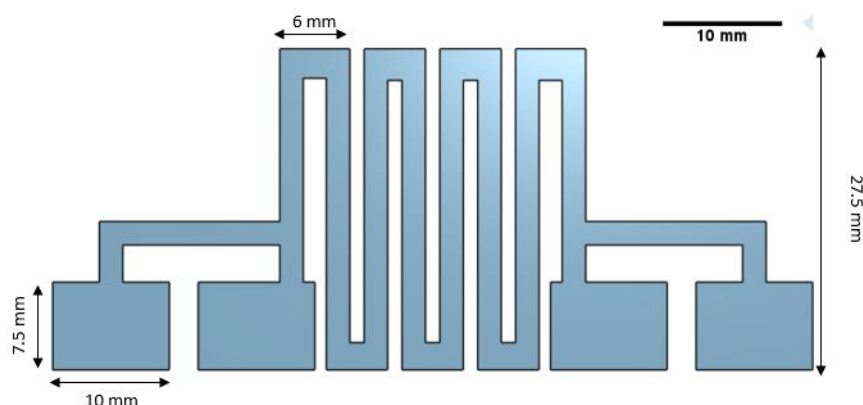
CAD model designed to be used for 3D printing of RTD sensors
